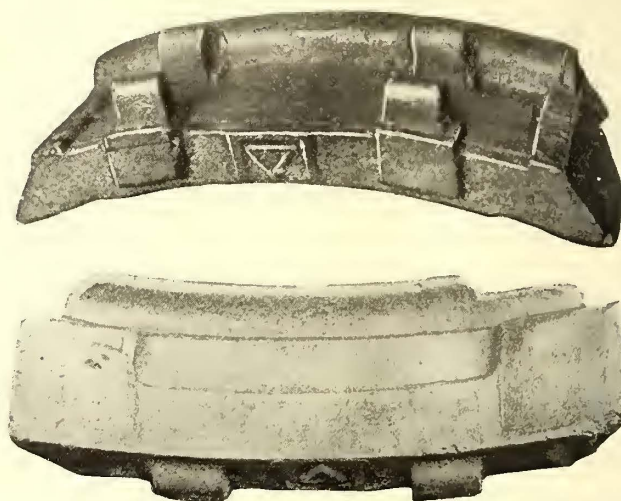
Manhattan Motor Shoe (Weight, 35 Lb.), 1903 Type
